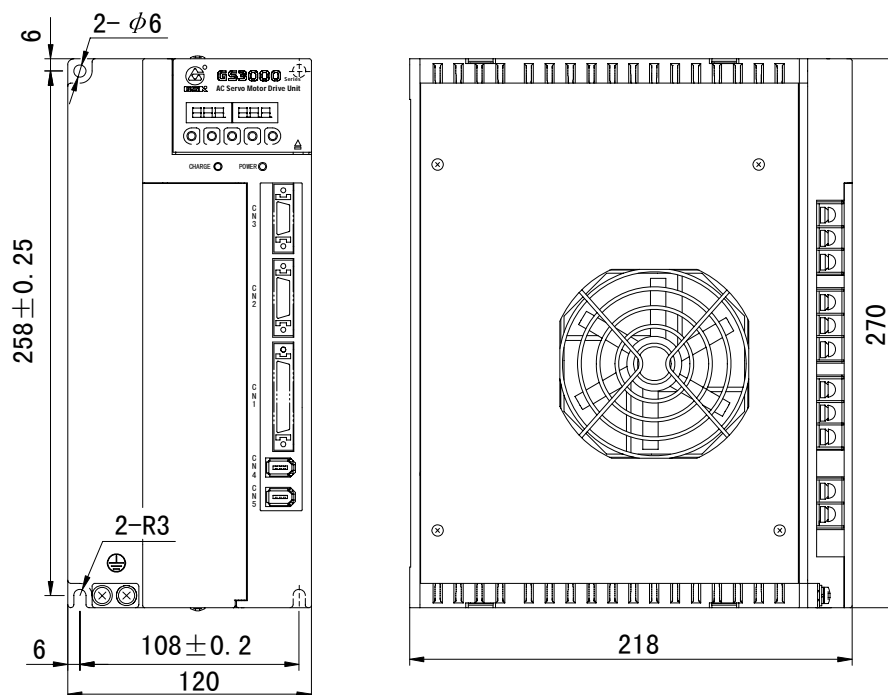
GS3050, GS4050 Series installation dimension (Unit: mm)
